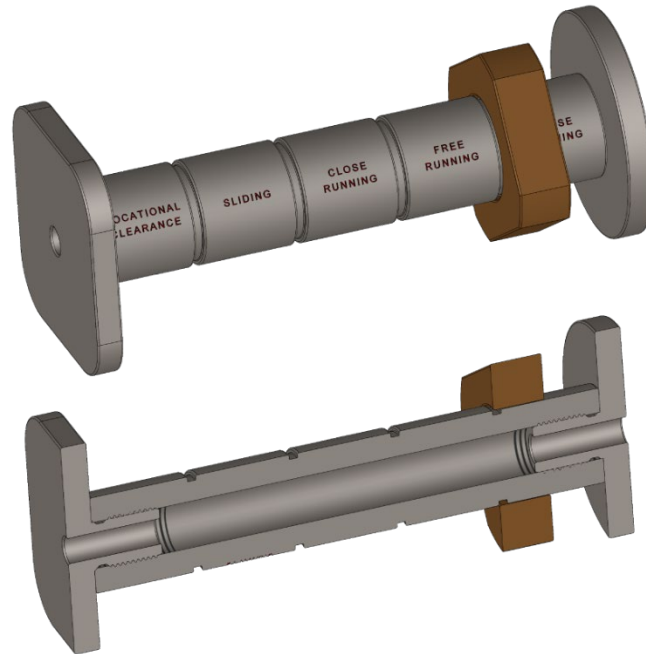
Fits Demonstrator – Concept 7 (including section view)
